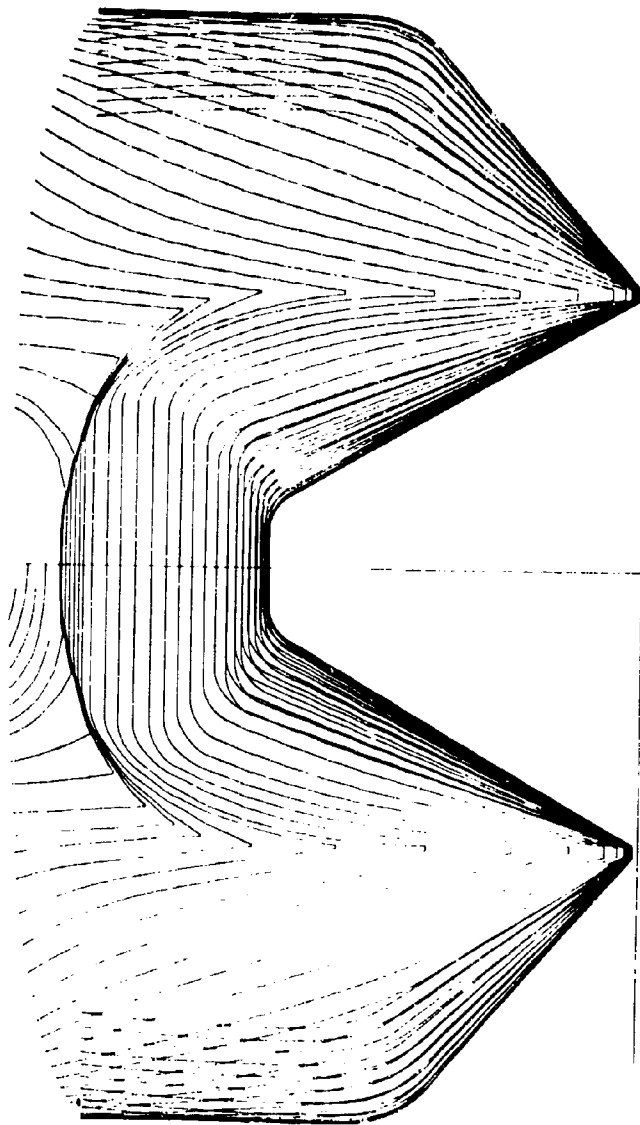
Computerized automatic drafting produced this drawing of a twin hull for Boeing
